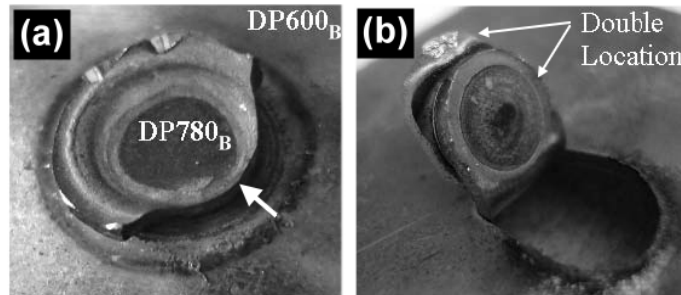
RSW weld failures in dissimilar pair DP600_B-DP780_B: a) cross-tension, b) lap-shear tensile
